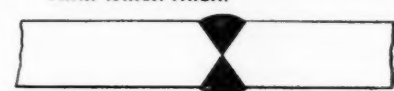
FORM OF WELDS FOR METAL OF, FROM 1/16 TO 1/8 INCH THICK.
